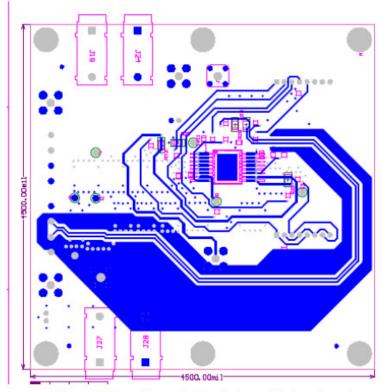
Board Layout - Fourth Layer (Bottom Layer)
